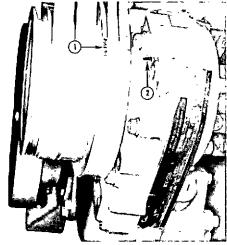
(N114220) Valve set marks - H-NH Series
